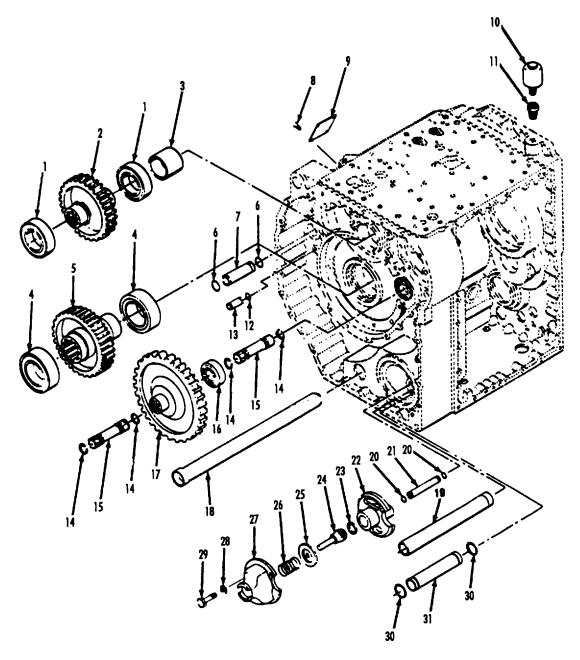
Output Drive Gear and Steer Shaft Drive Gear
